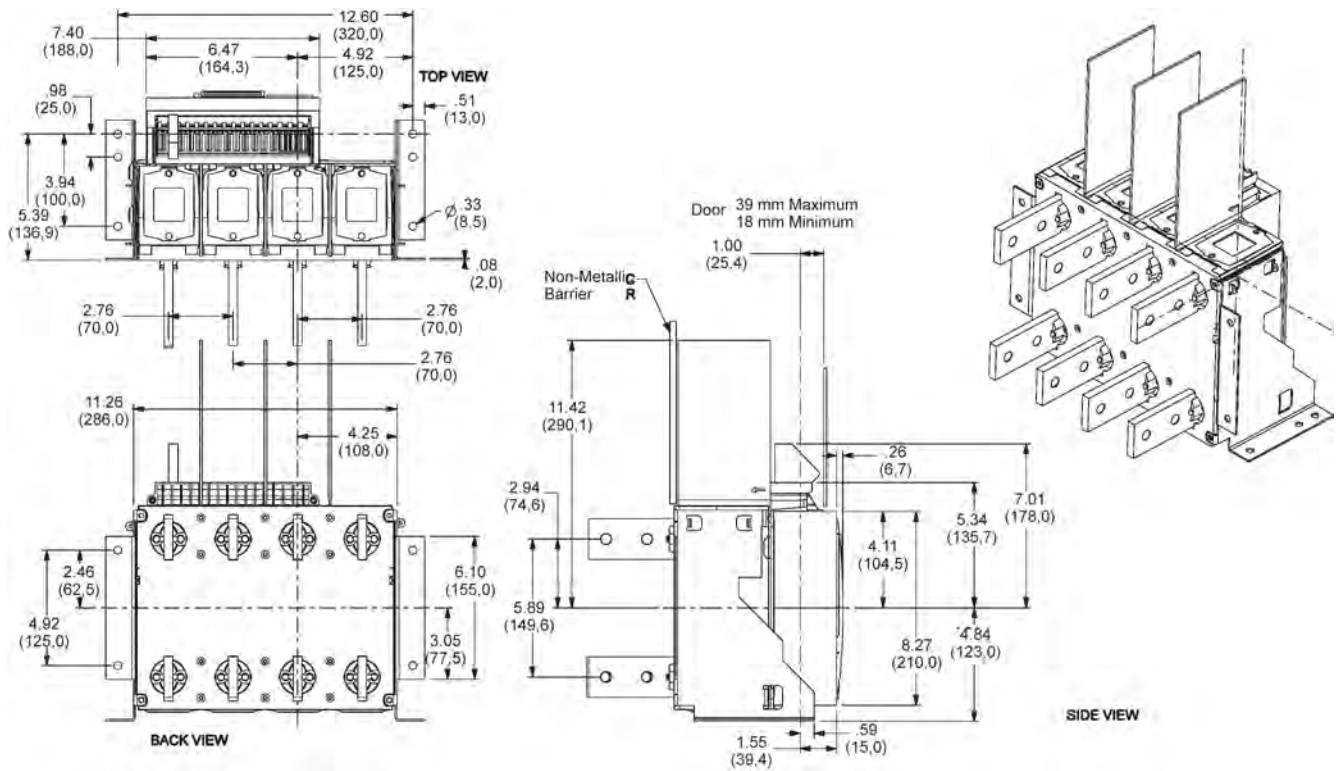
800-1200 A MasterPact NT Drawout and Fixed—Pan Dimensions
